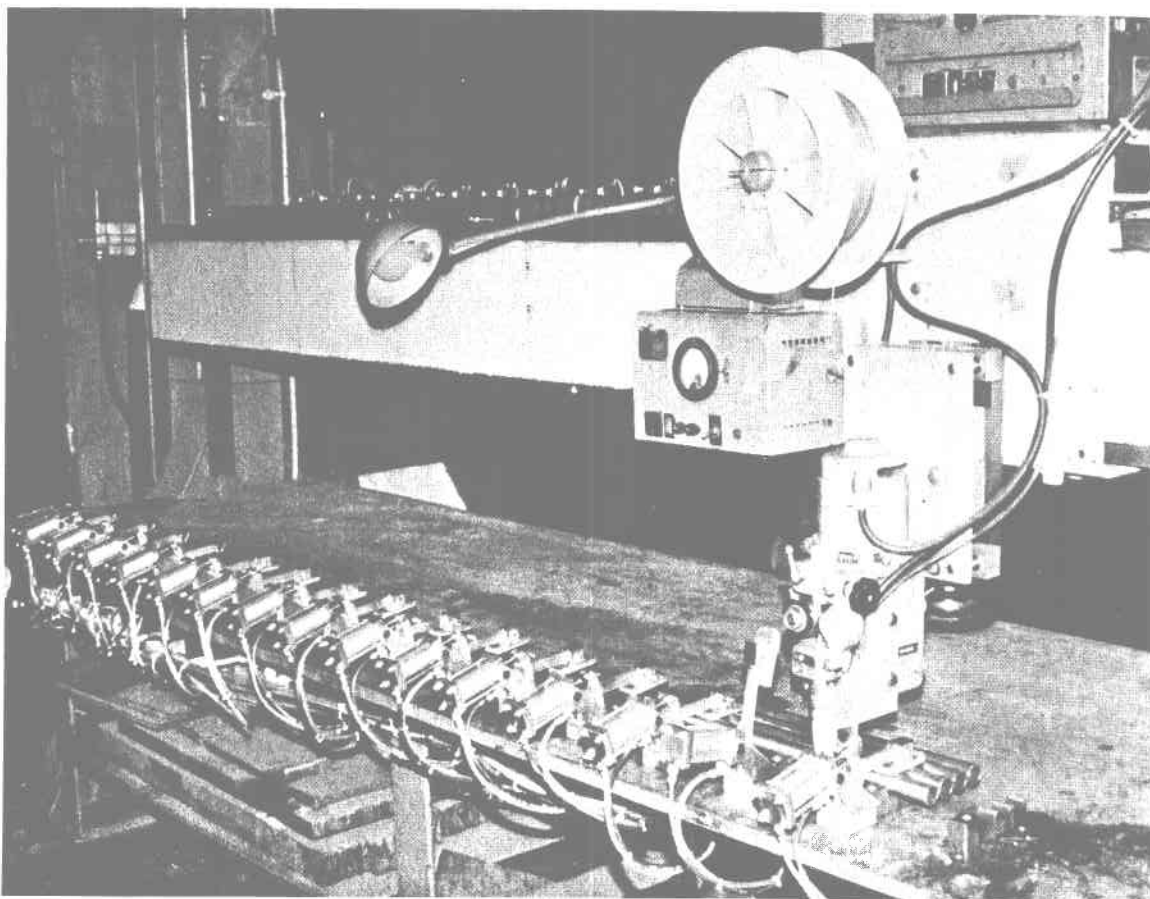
Overall View of Welding Set-Up Showing the Welding Head, Wire Reel, Controls, Cross-Beam Carriage, and Pneumatically Actuated Toggle Clamps
